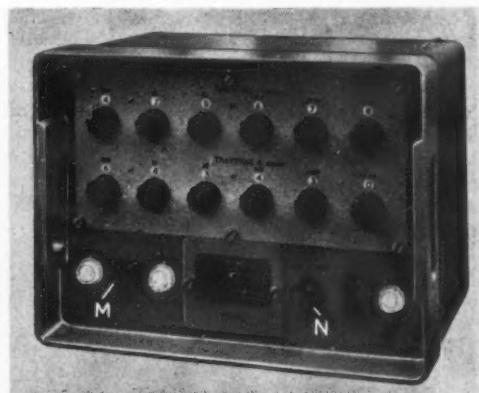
This Ekco Control Unit is Part of the Alternative Positioning System which Can be Fitted to the Industrial Techniques Co-ordinate Drilling Machine
